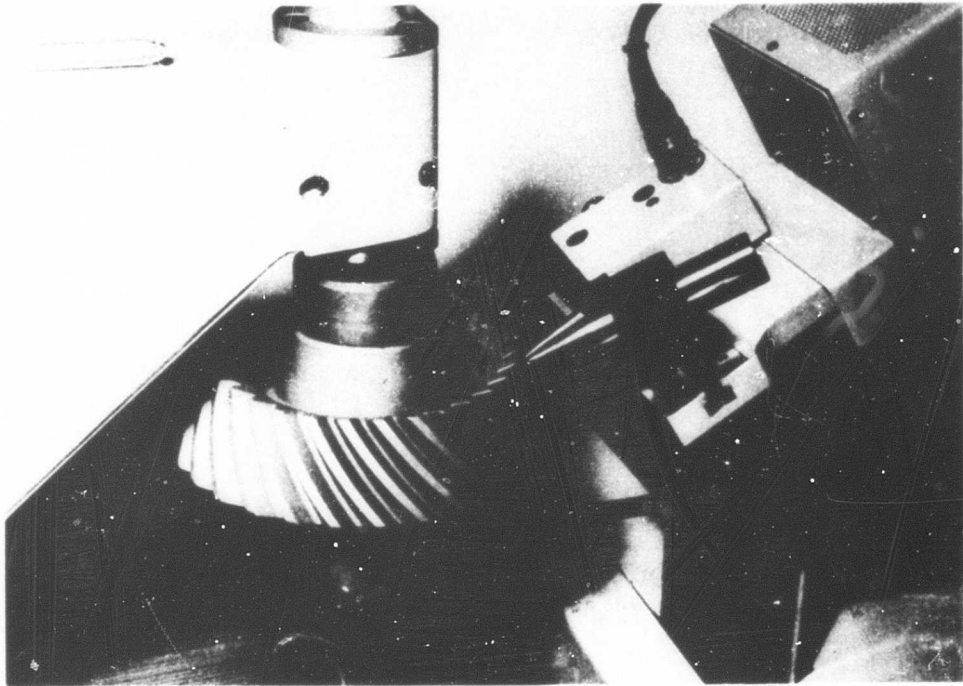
Measurement of Runout on the Input Stage Spiral Bevel Pinion Performed by the Hofler Gear Measuring Machine.
